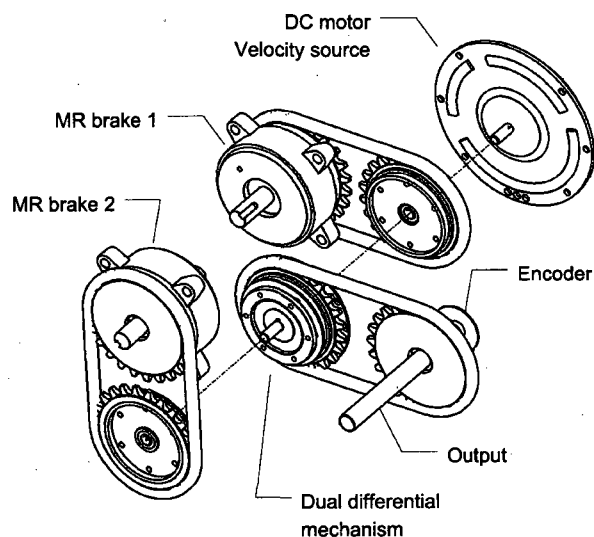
Exploded view of the proof-of-concept prototype mechanism
